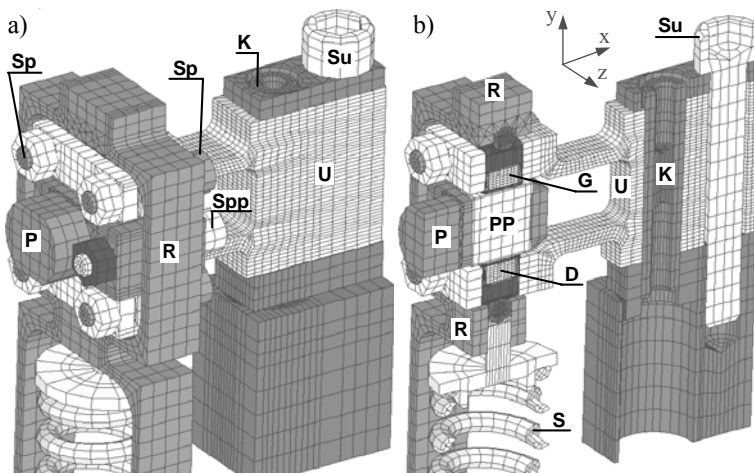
Main part of the test head assembly: a) general view, b) axial section – details in table 1
